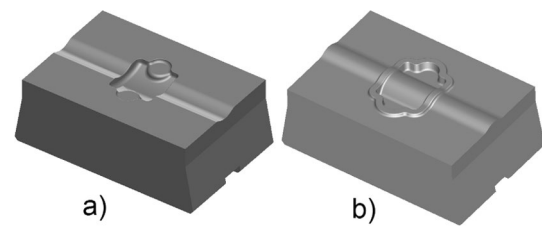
Tool geometry: a lower die, b upper die
